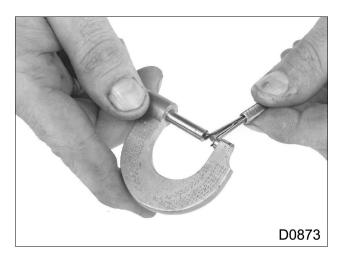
Measurement of Small Hole Gauge (valve guide ID)
